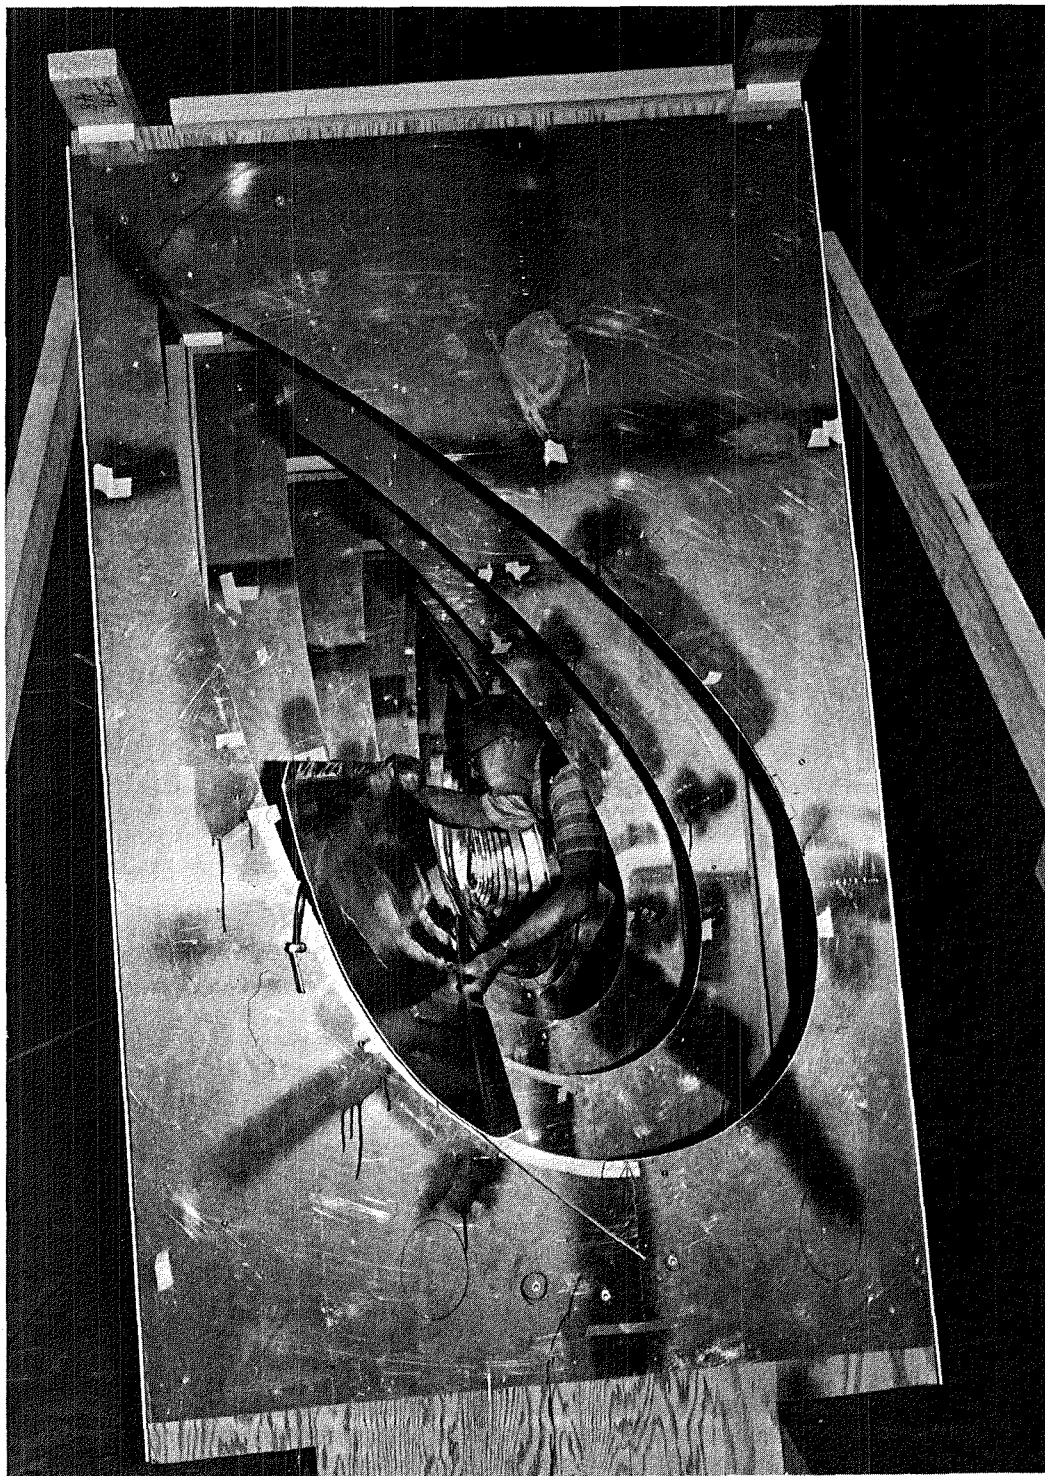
Blade Fixture Jig Showing Length, Twist and Contour Check Points
